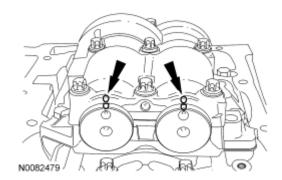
Locating Balancer Unit And Shafts Reference Mark
